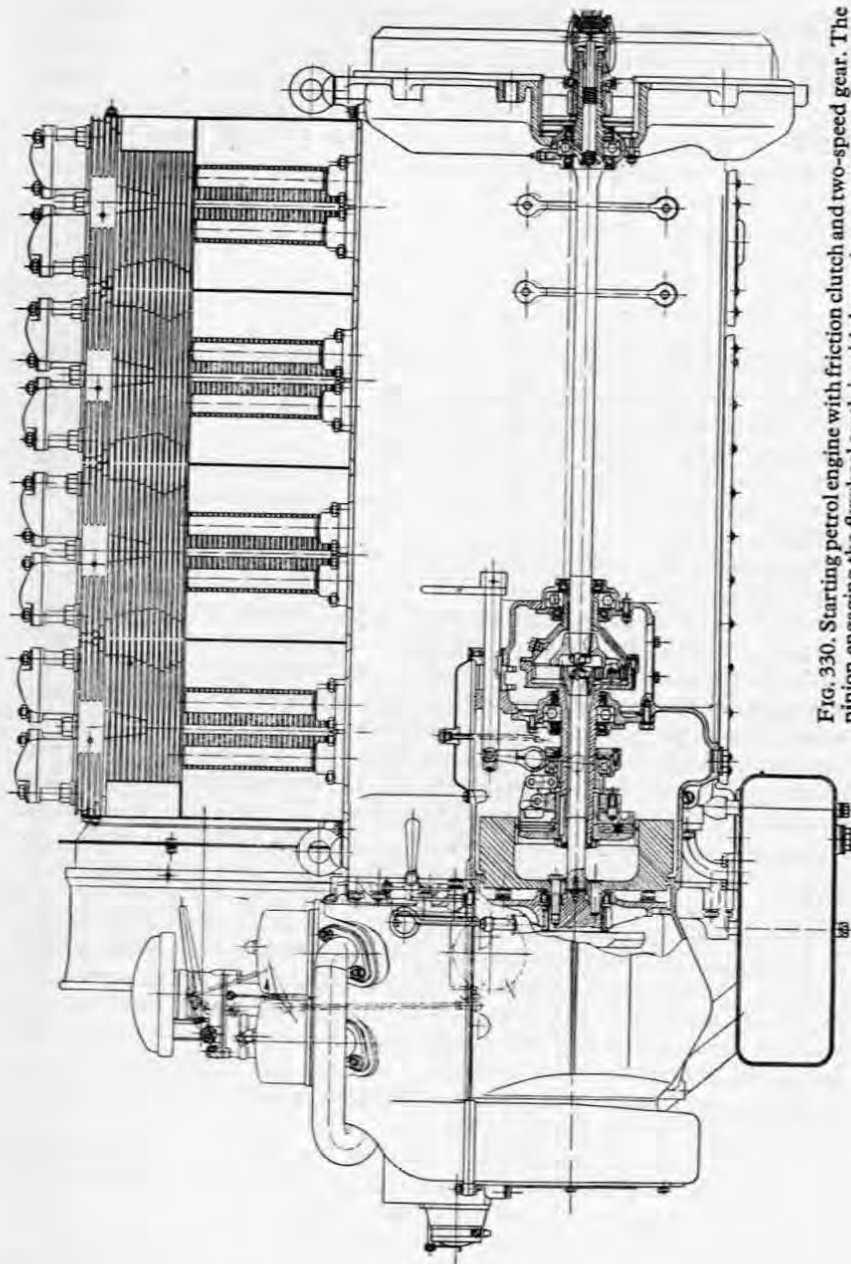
Starting petrol engine with friction clutch and two-speed gear. The pinion engaging the flywheel teeth is withdrawn by a centrifugal governor.
